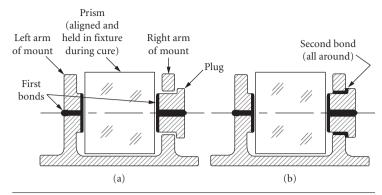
Concept for supporting a prism from both sides. (*a*) Prism bonded to left arm of mount and plug bonded to prism. (*b*) Plug bonded into right arm of mount. (*Adapted from Beckmann*.²⁸)
